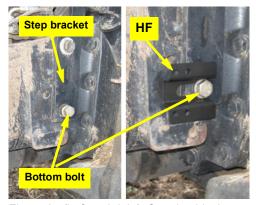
(Left and right): Steering block mounting location (L) and installed mounting (R)
